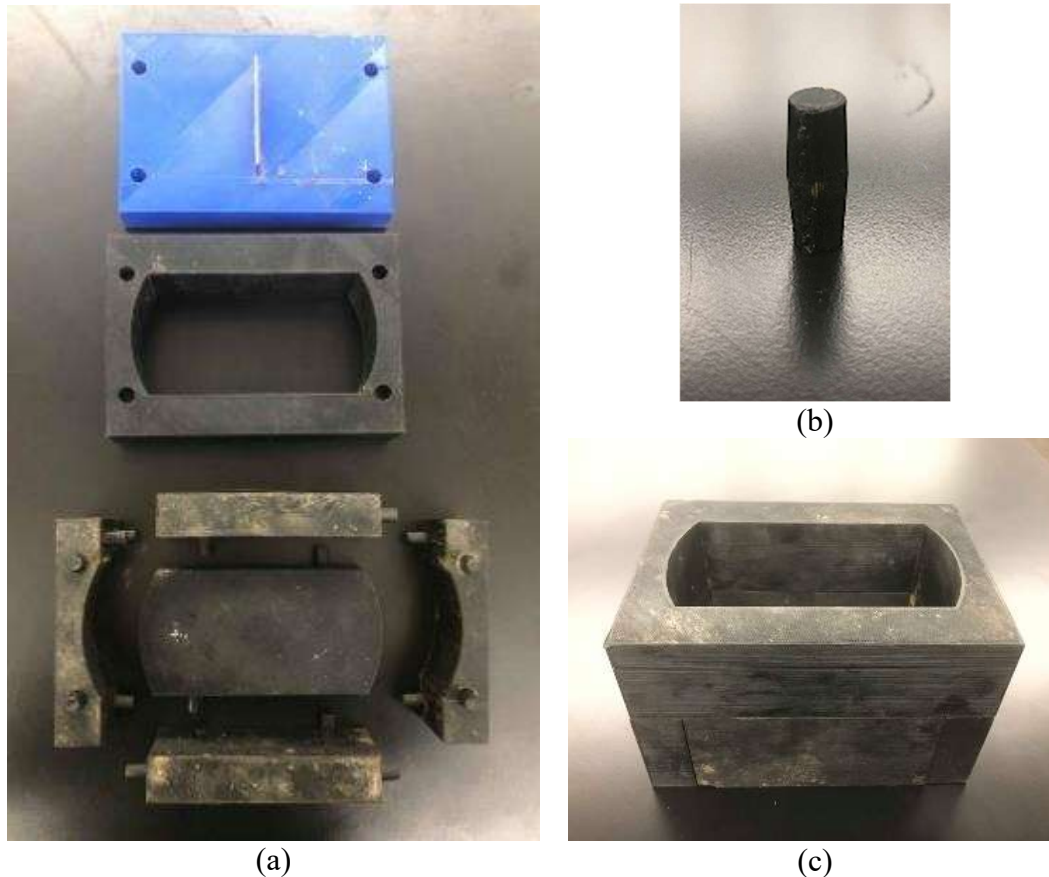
3D-printed mold after the second trial, (a) 7 parts printed where all the parts are female, (b) detachable pin, and (c) mold assembled.
